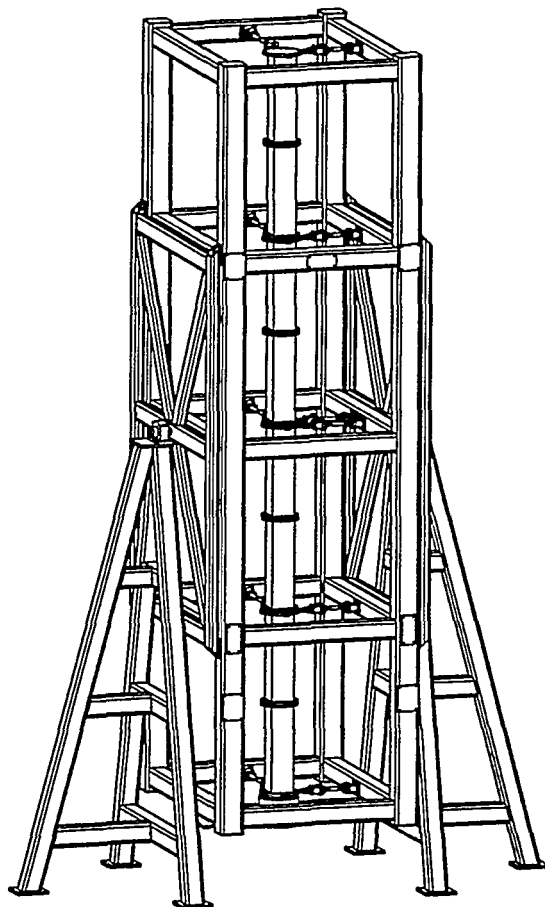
, RFQ and Frame, Vertical Assembly Configuration
